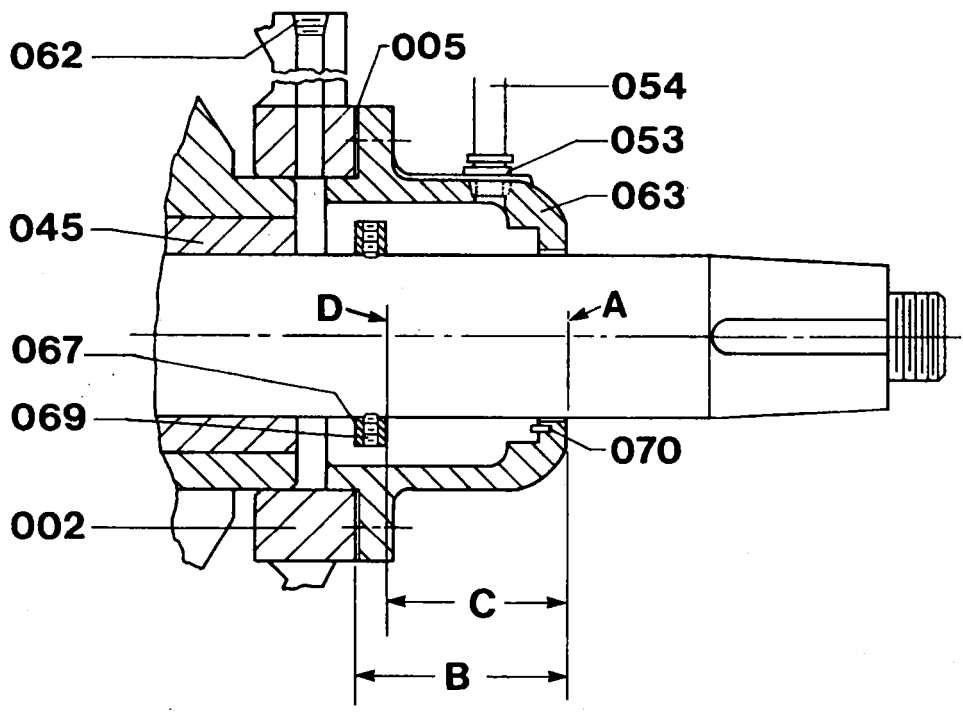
Position Setting of Seal Sleeve (Crane 21 Seal)
